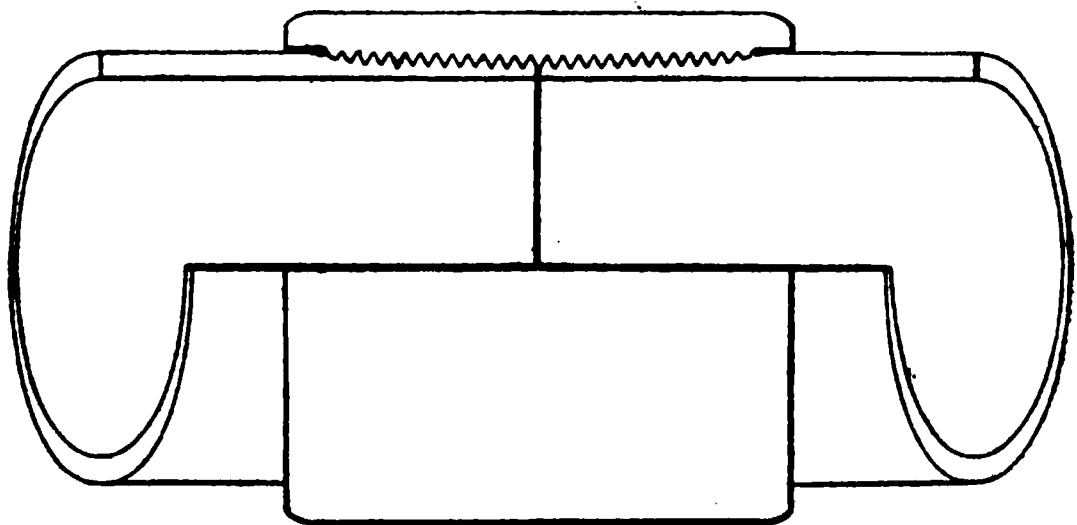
Typical Section of Drive Pipe Coupling and Joint
